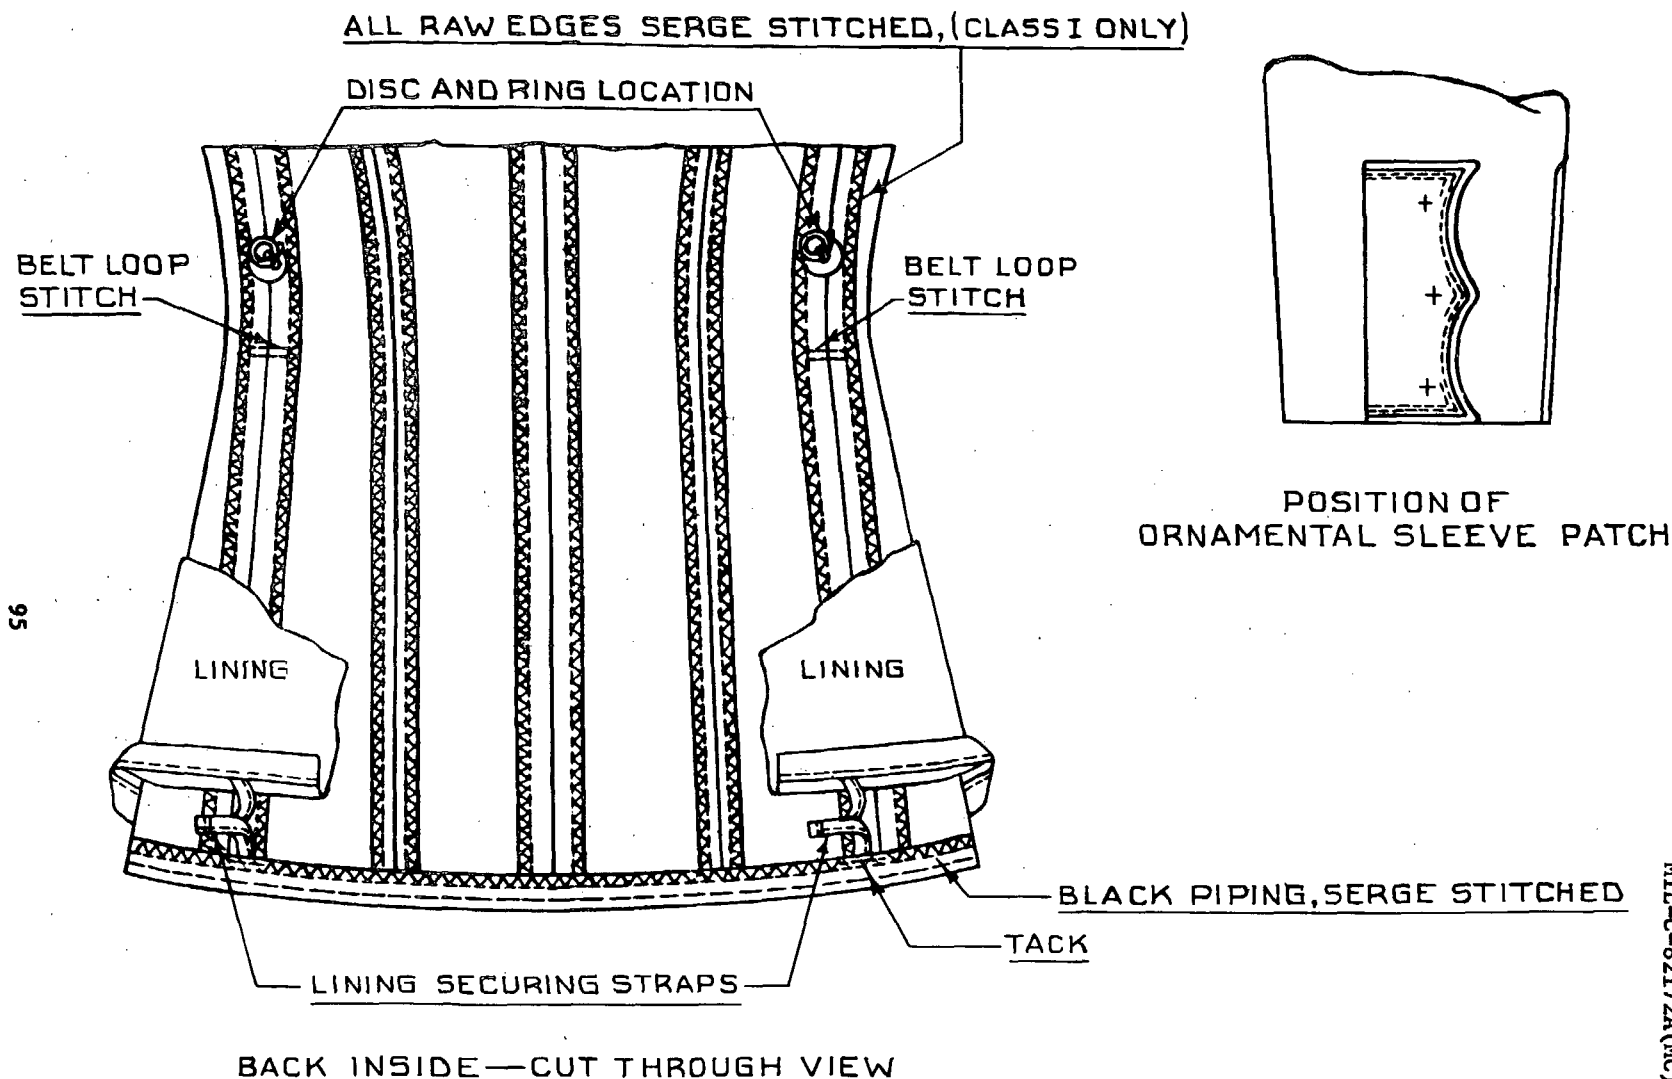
COAT, MAN'S: SCARLET, DRUM & BUGLE CORPS; DRUM MAJOR
